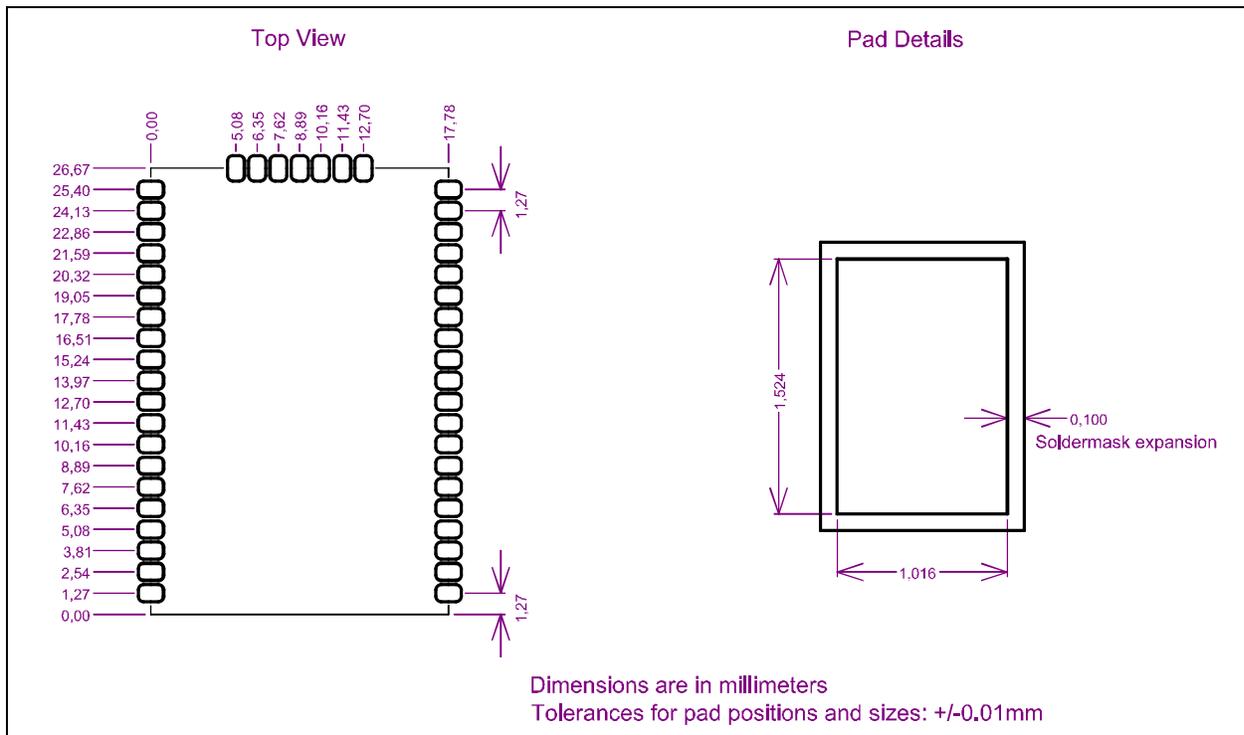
RECOMMENDED PCB FOOTPRINT
